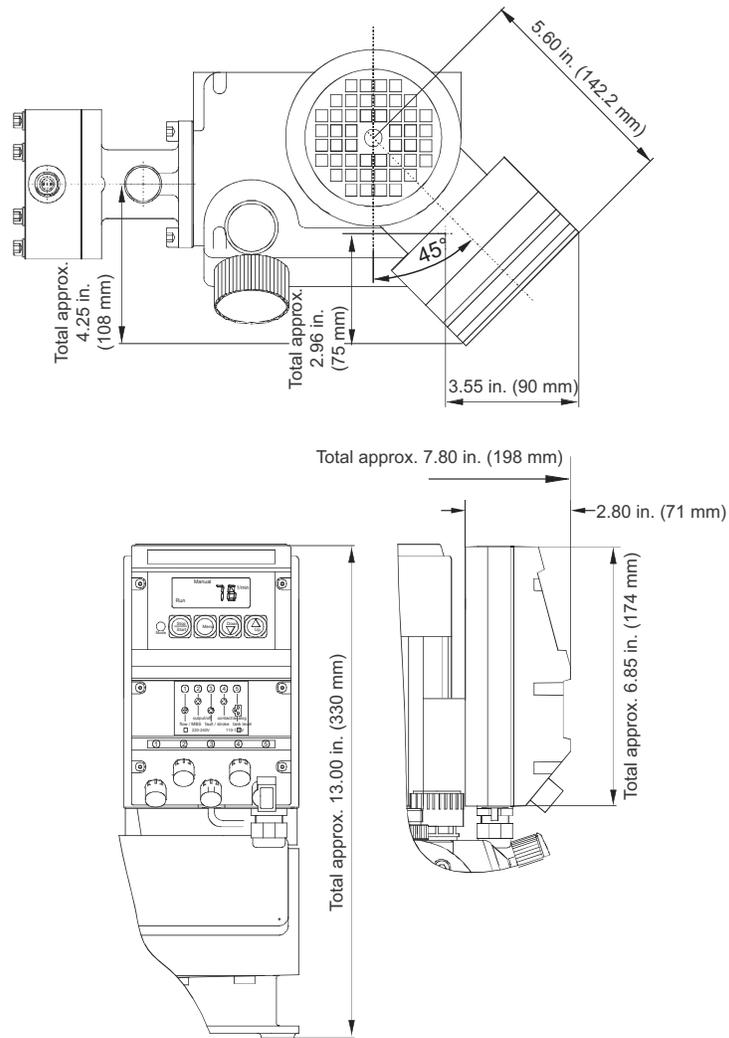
Dimensions, AR control unit (mounted on DMH)
